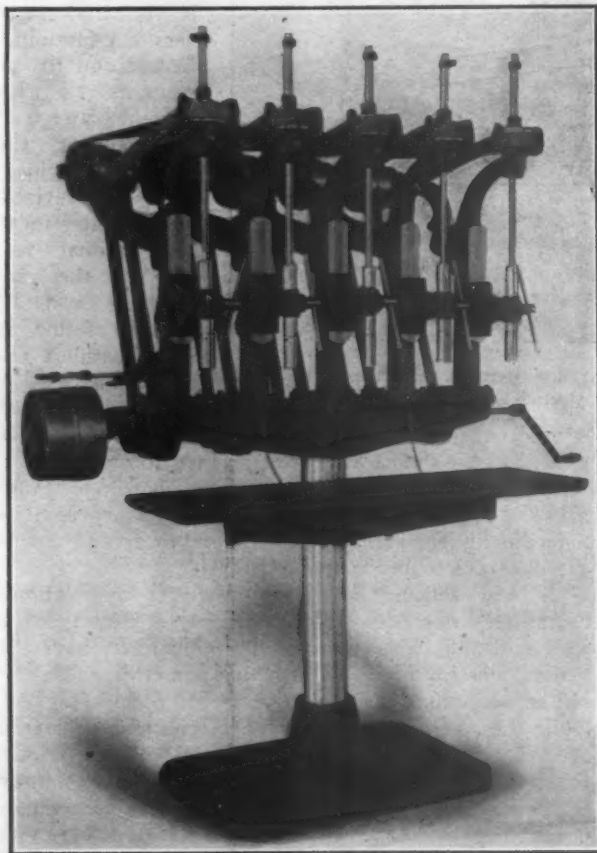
A Five-Spindle Sensitive Drill with Self-Contained Countershaft Built by the Rockford Lathe & Tool Company, Rockford, Ill.
